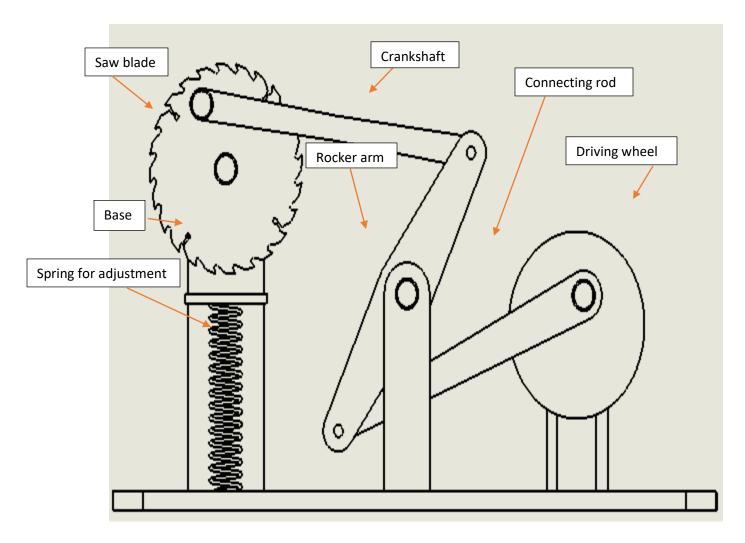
3D CAD MODELS USING SOLIDWORKS
